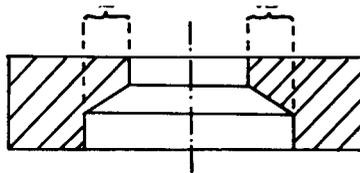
Section showing sloping 'upper roof' with the same projected plan area as in Fig. 3
